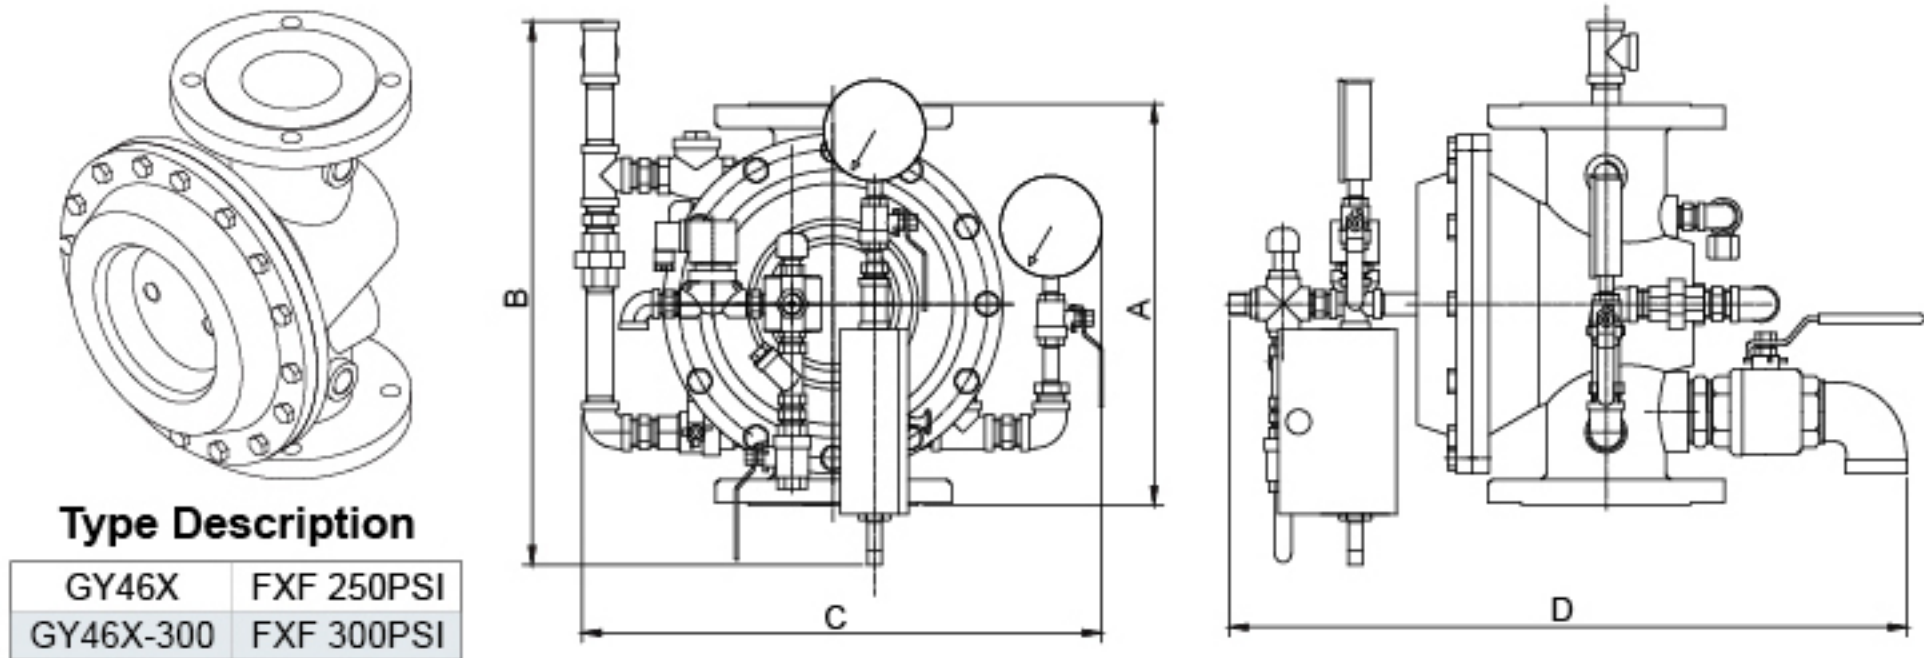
Outline dimensional drawing of deluge valve (Grooved * Flange connection)
